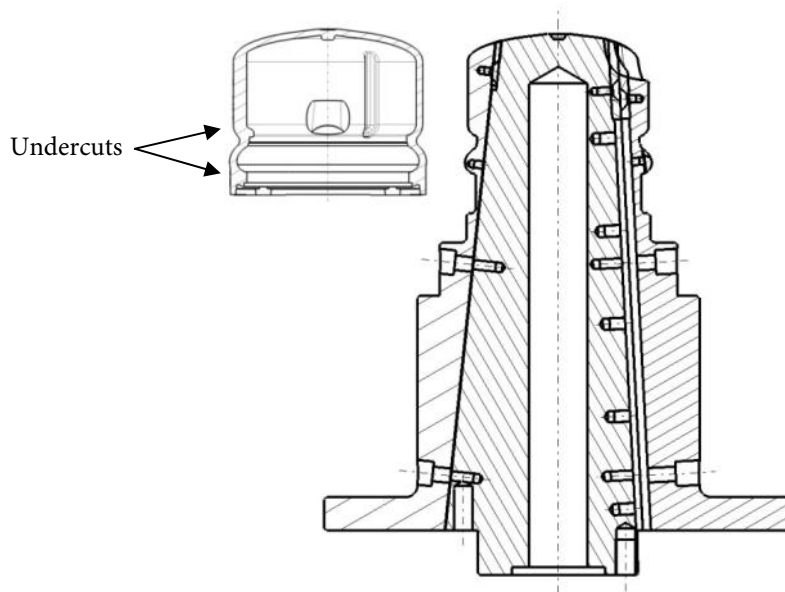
A cross section of a pump housing in the upper left and a cross section of the corresponding collapsible core. The collapsible core makes the inner geometry of the pump housing during the moulding process. Notice the undercuts in the pump housing. They make it difficult to retract the insert after moulding, which is why the collapsible principle is needed.
